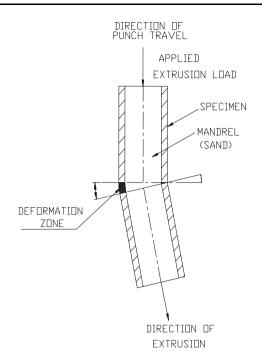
Schematic diagram showing direction of punch travel, mandrel, deformation zone, exit direction of extrusion, of the tubular specimen used for ECA pressing
